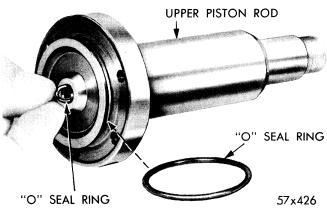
Installing Valve Rod Lower "O" Seal Ring
